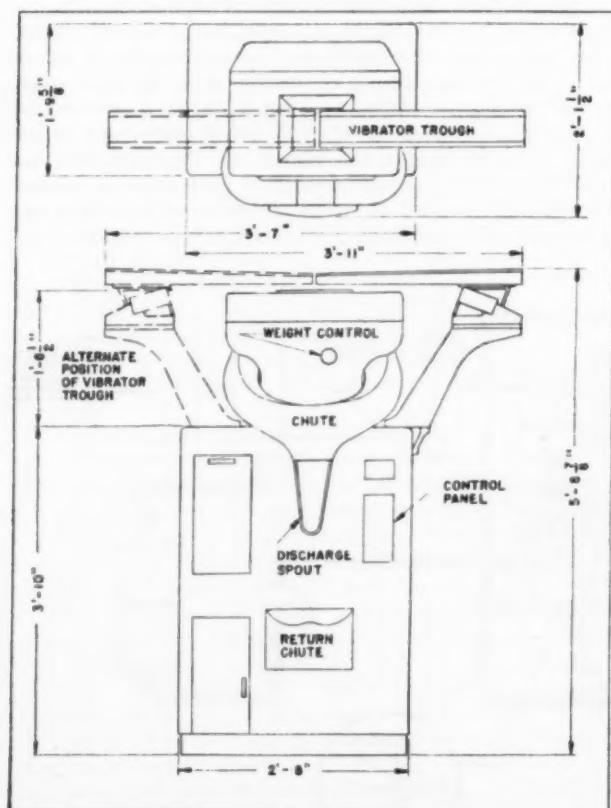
OUTLINE DRAWING OF WEIGHING MACHINE
